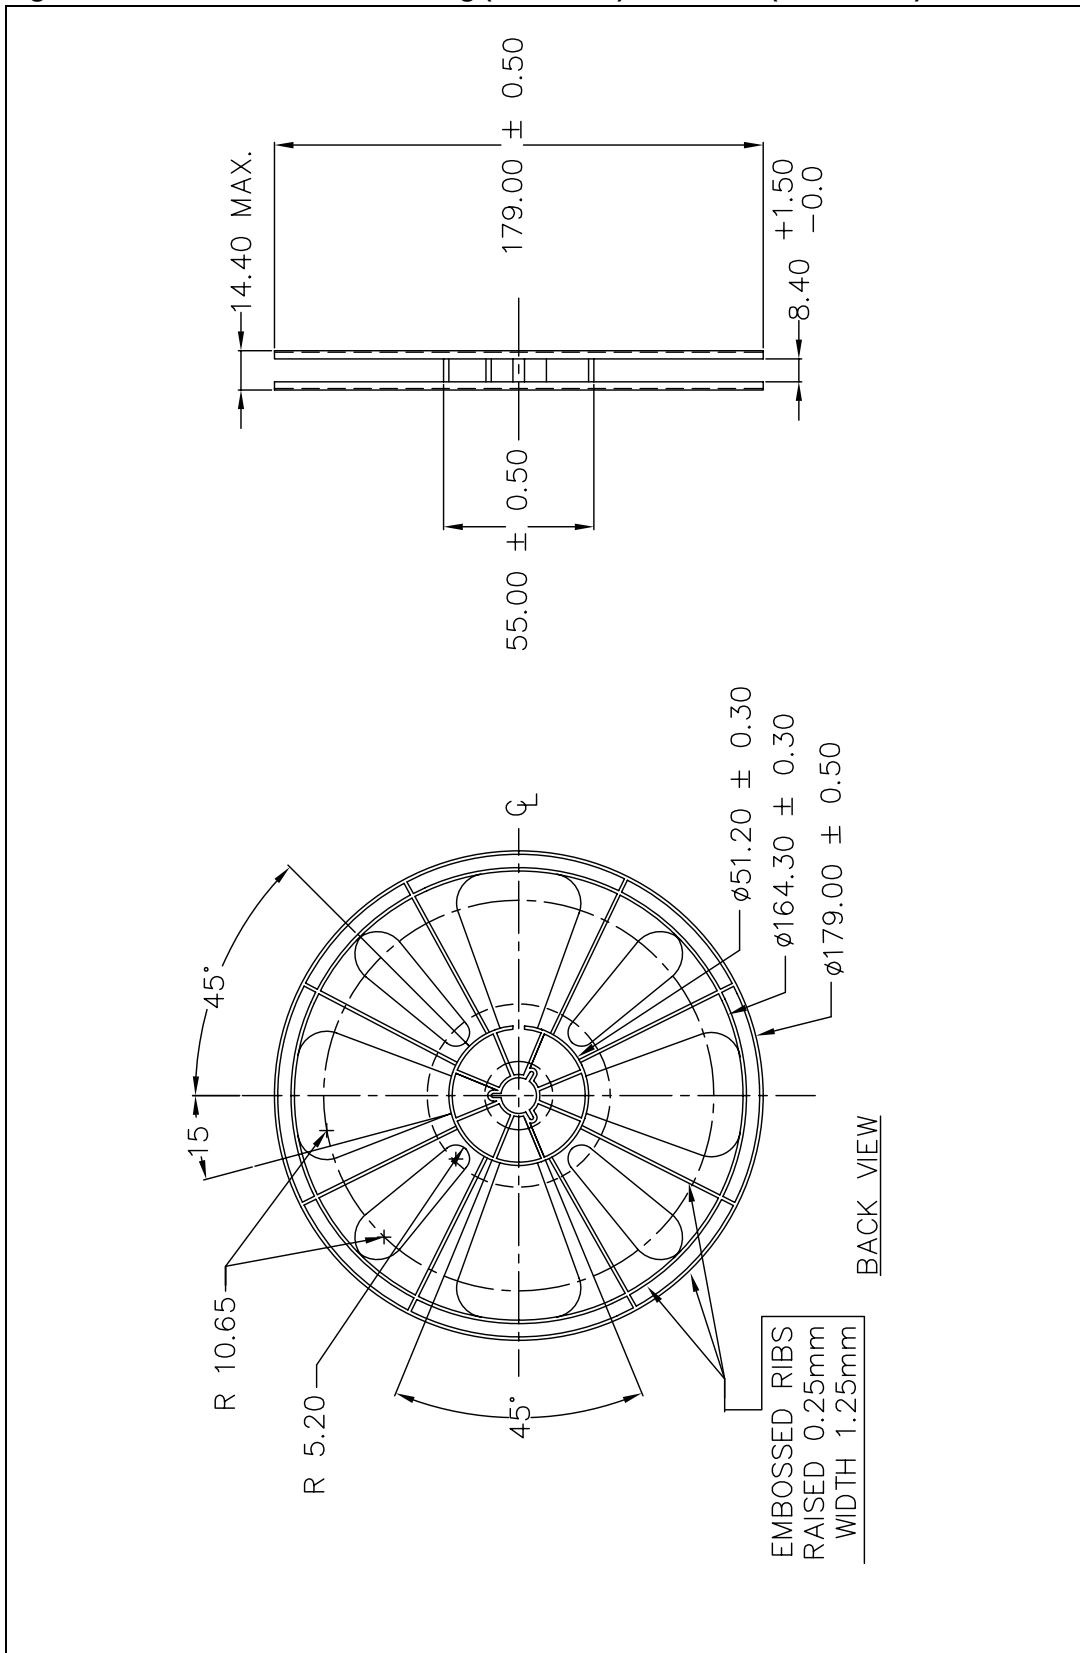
Reel information drawing (front view) for DFN6L (1.2 x 1 mm)
